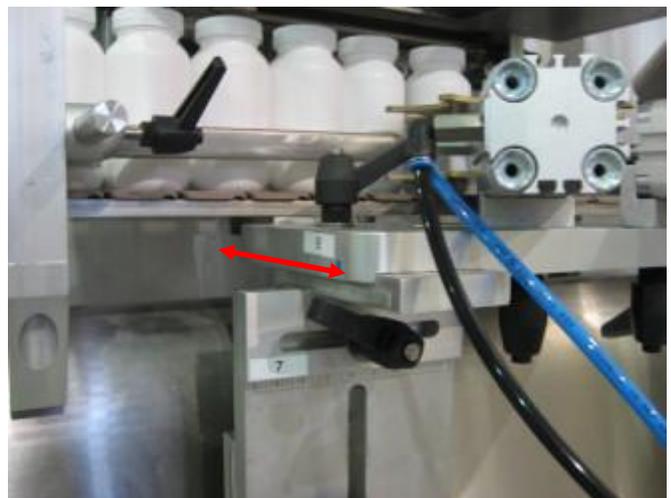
The adjustments can also move the star wheel assembly in or out from the container. The wheel must not be restricted by the rails.
